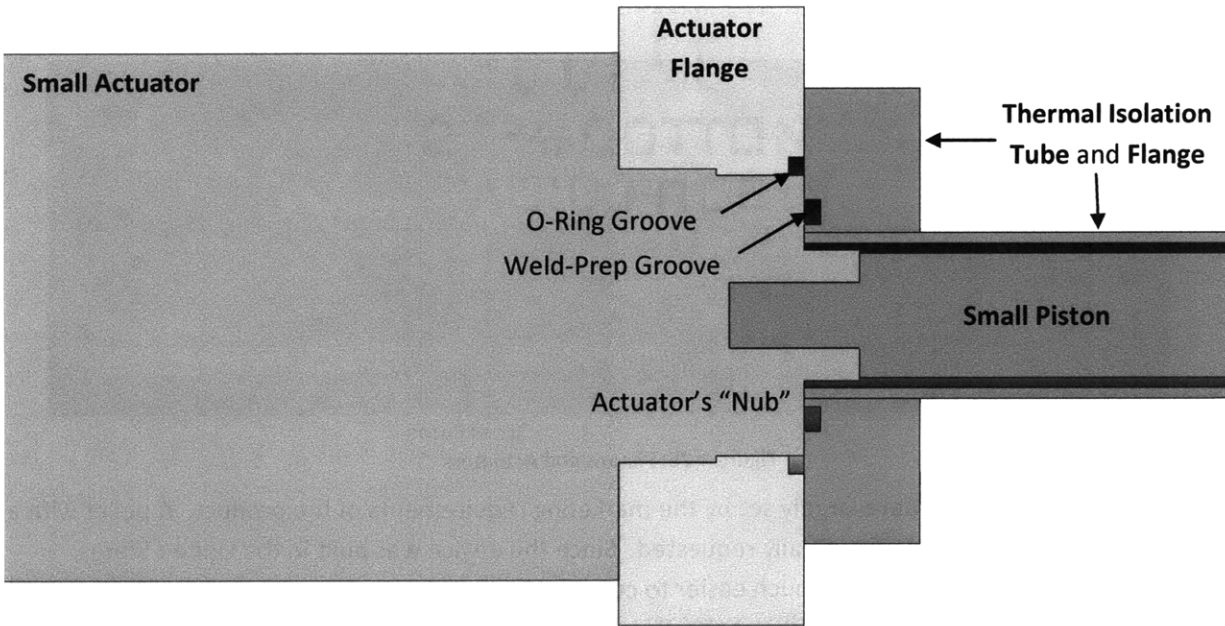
Actuator Flange Cross Section, Small Actuator Side
